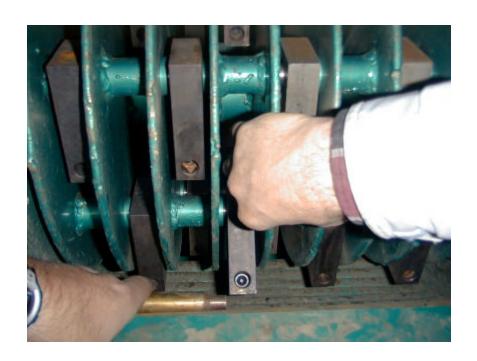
Bouldin & Lawson Rotary Drum Ordnance Deformer Showing the Drum's Cutters/Hammers
